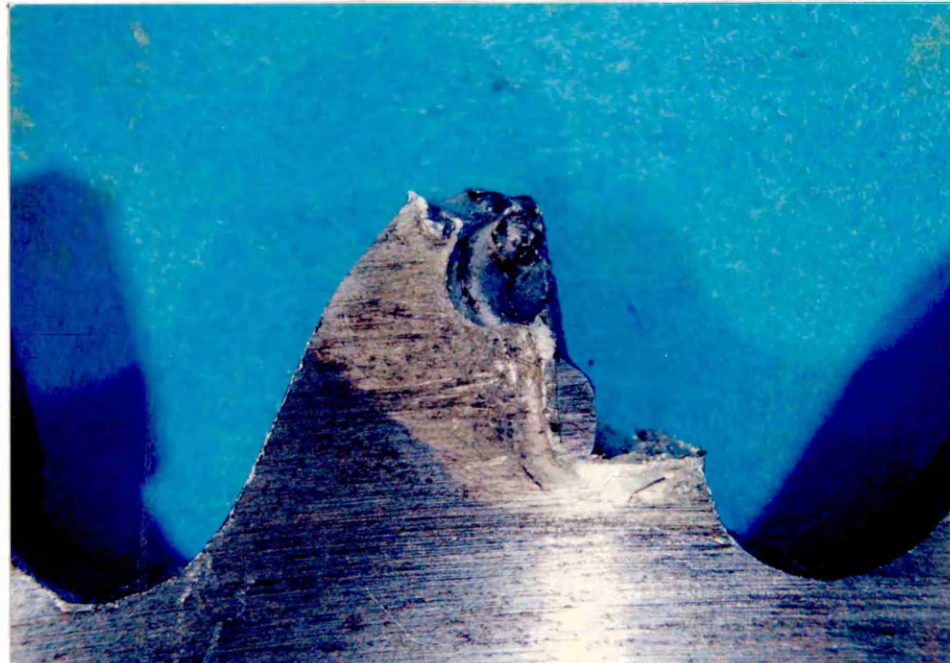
The tooth is removed caused by destroying the brazed joint between carbide tip and shank of the blade.
